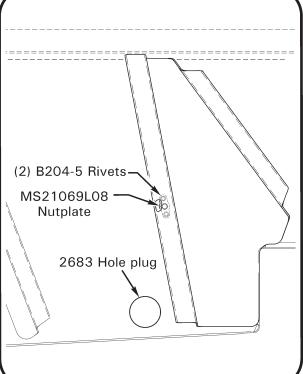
Nutplate and hole plug installation (helicopter RH side shown)
